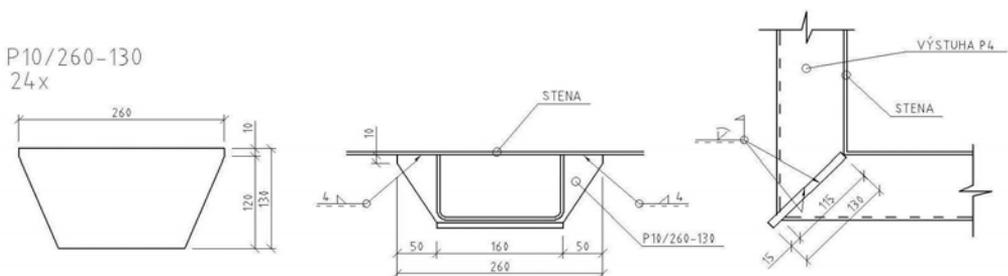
Detail1-Strengthening stiffeners in the corners of elbow and silencer [3]
